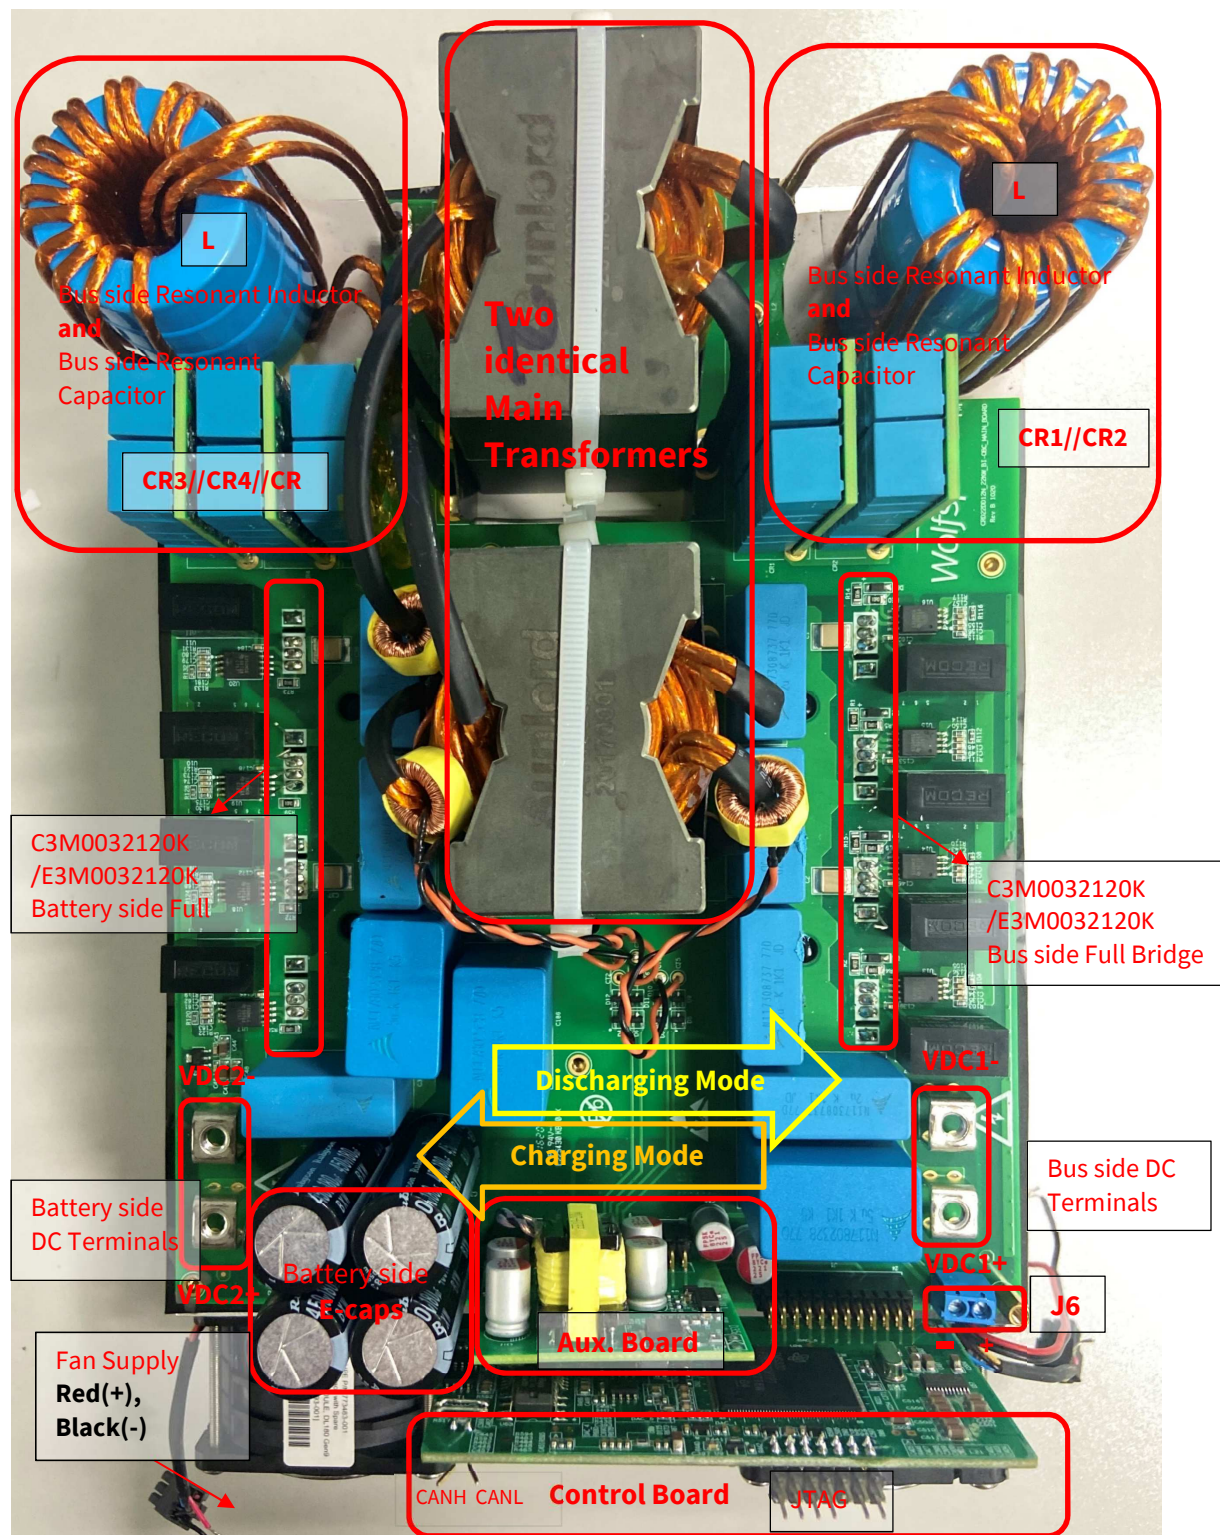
Top view of PCBA (250 mm * 190 mm * 55 mm)
